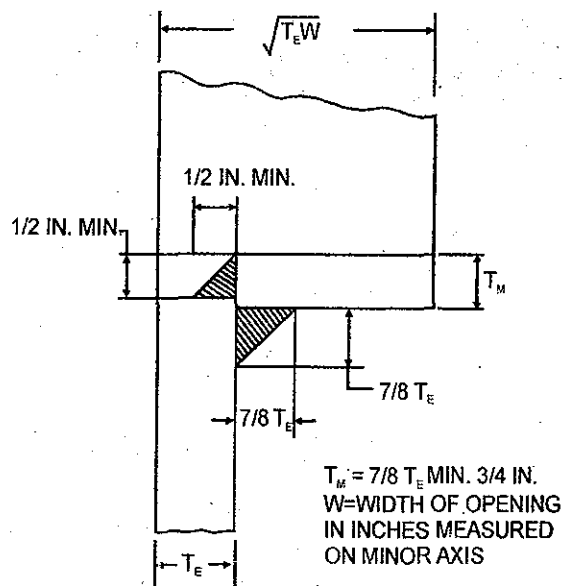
WELDING DETAIL FOR MANHOLE IN FLAT END PLATE
